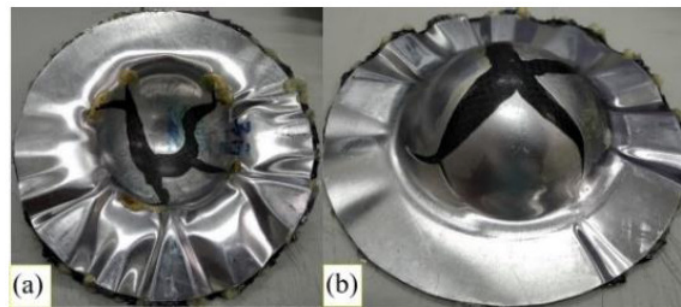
Deep drawing of Al 1050-composite sandwich: (a) front view, (b) back view.
